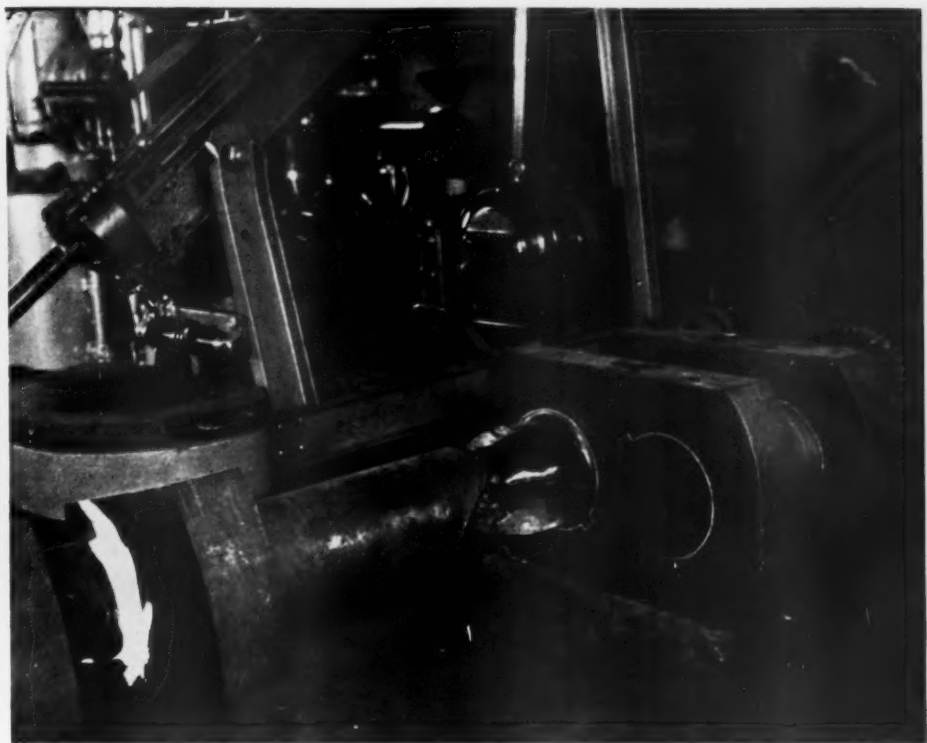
Crankshafts formerly discarded upon being fractured are repaired through welding process which saves many thousands of dollars
